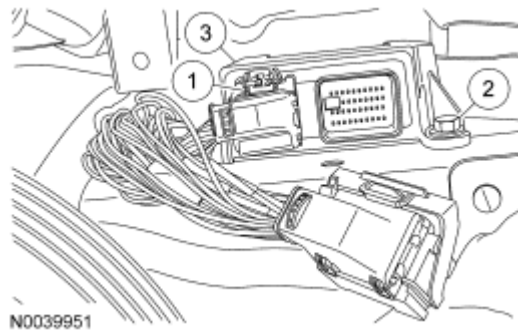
Identifying RCM, Electrical Connector And Bolt
